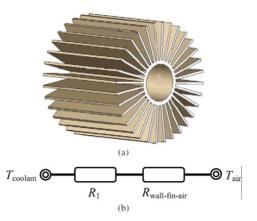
Heat transfer using flowing liquid running inside a tube radiator. (a) Cylindrical tube radiator with fin structure. (b) Thermal resistance between coolant and ambient air.
